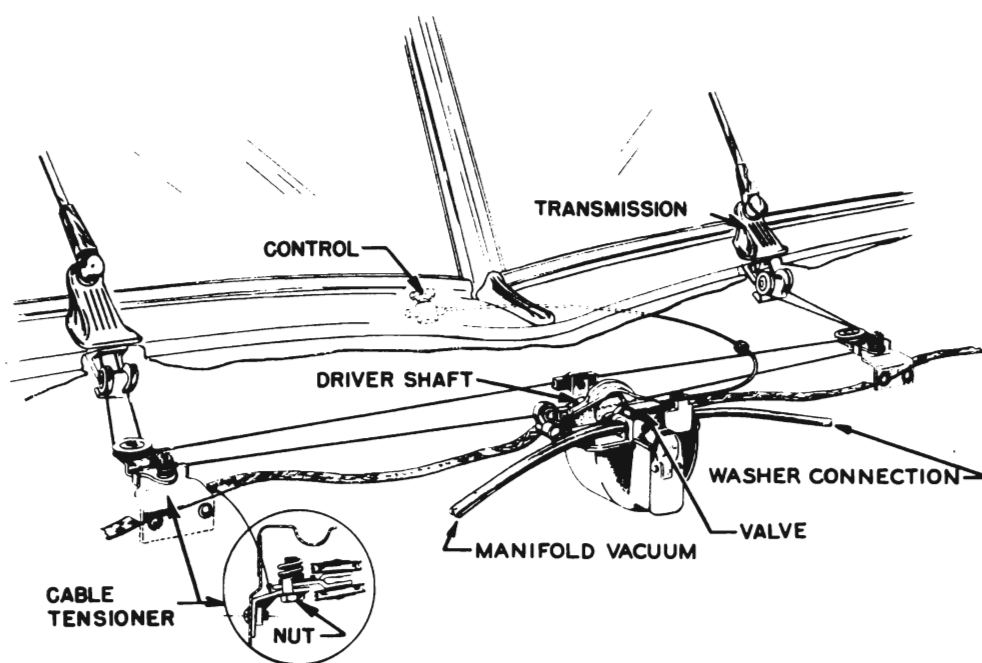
Windshield Wiper Installation—1948 Series 50-70
